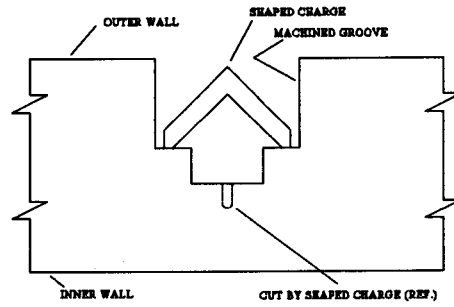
, TYPICAL VESSEL CROSS SECTION SHOWING GROOVE AND SHAPED CHARGE
